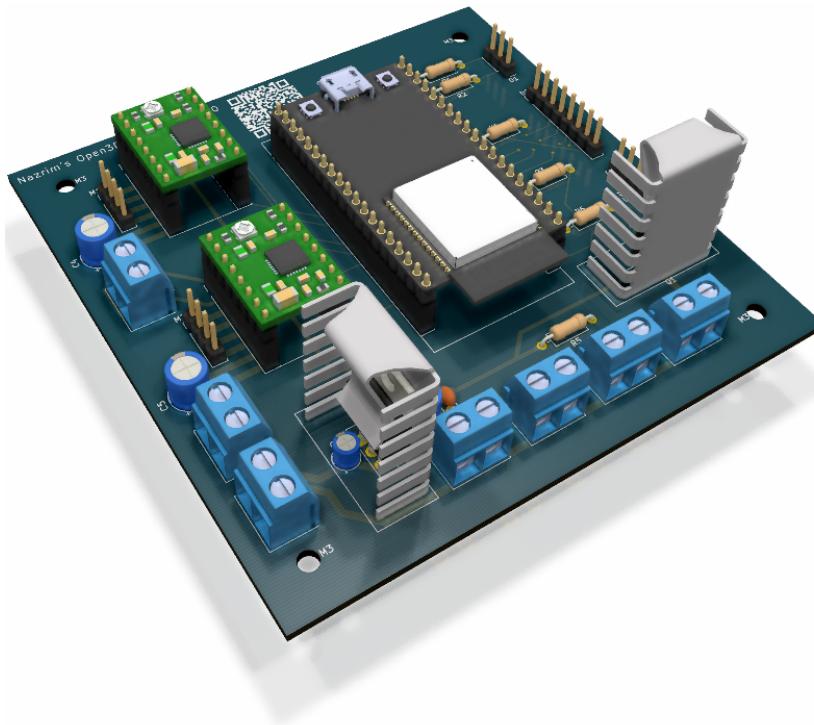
3D rendering of the PCB including components for the Open3DScanner designed in KiCad
